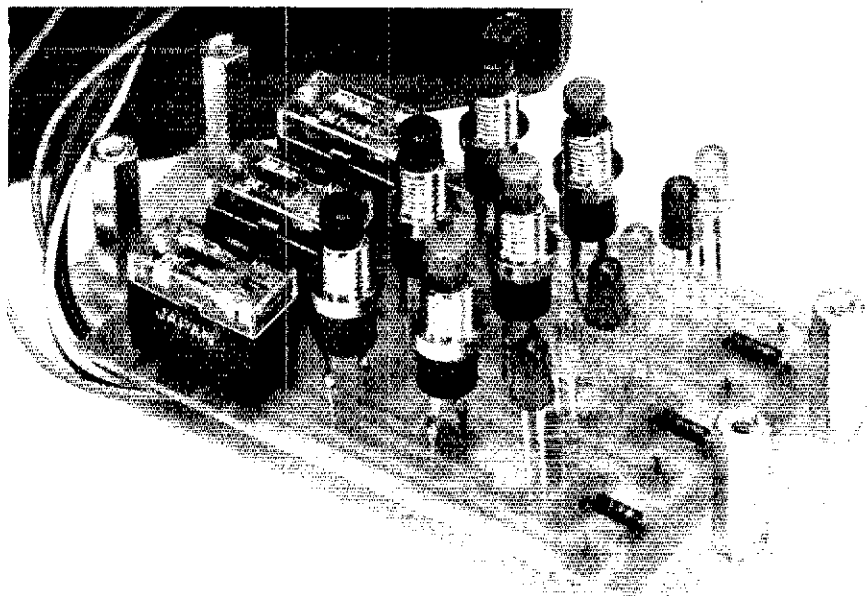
The completed PC board mounts to the control-box top by means of no. 4-40 screws and 3/4-inch threaded spacers. The corners of the circuit board must be removed to clear the mounting posts for the control-box top.
